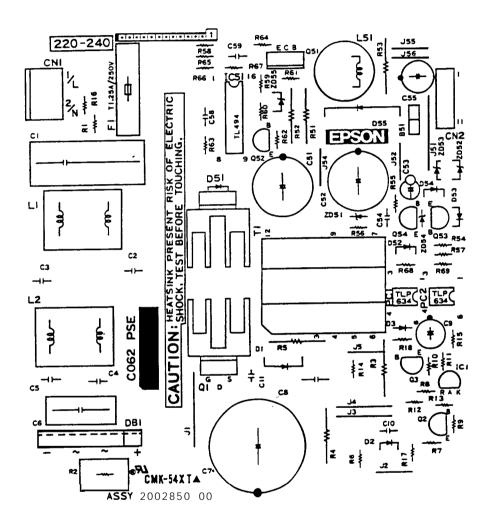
1. BOARD ASSY., POWER SUPPLY (C062 PSE Board) Component Layout
